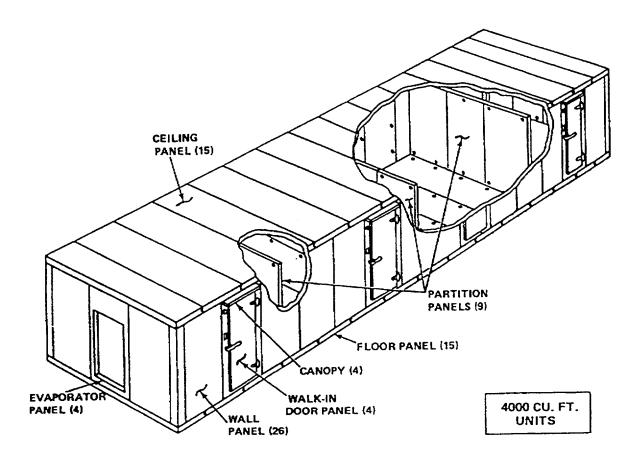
Refrigerator, Panel Type, Prefabricated Assemblies, 4,000 Cubic Feet Units (Sheet 2 of 2)
